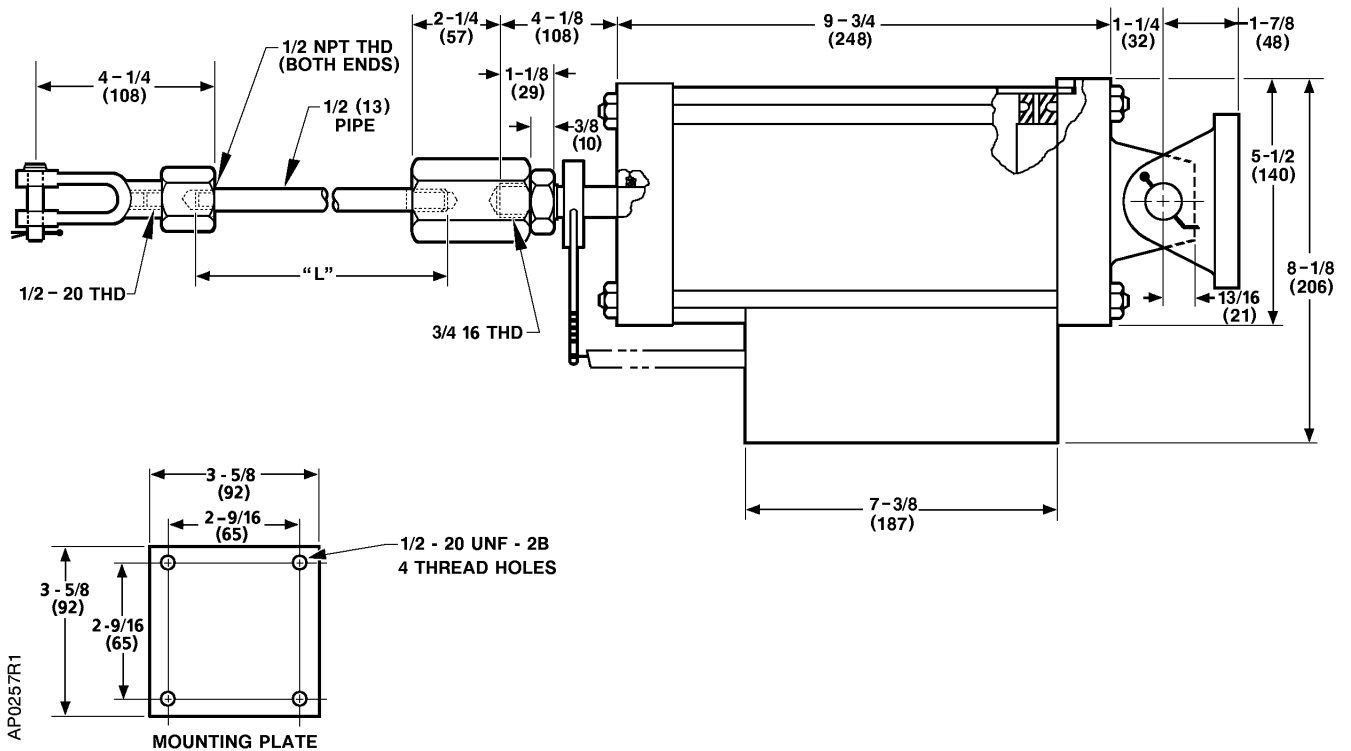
LC Actuator Dimensions in Inches (Millimeters).
